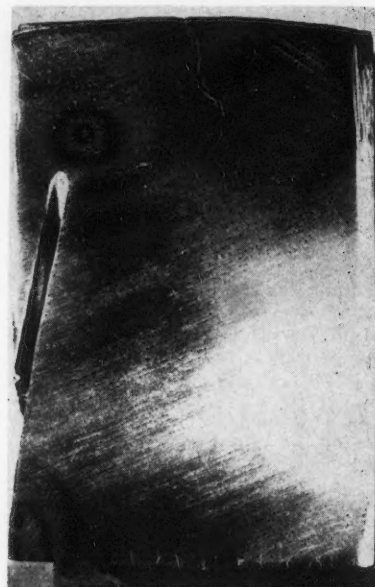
Case 2. Section through the top tube sheet of the AISI 347 waste heat boiler showing the thermal-corrosion cracks in the top surface, and the stress corrosion cracks in the bottom surface. X2.
